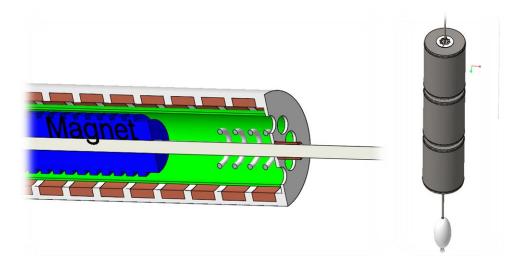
Linear Generator with components (Left) and Linear Generator (Right)
